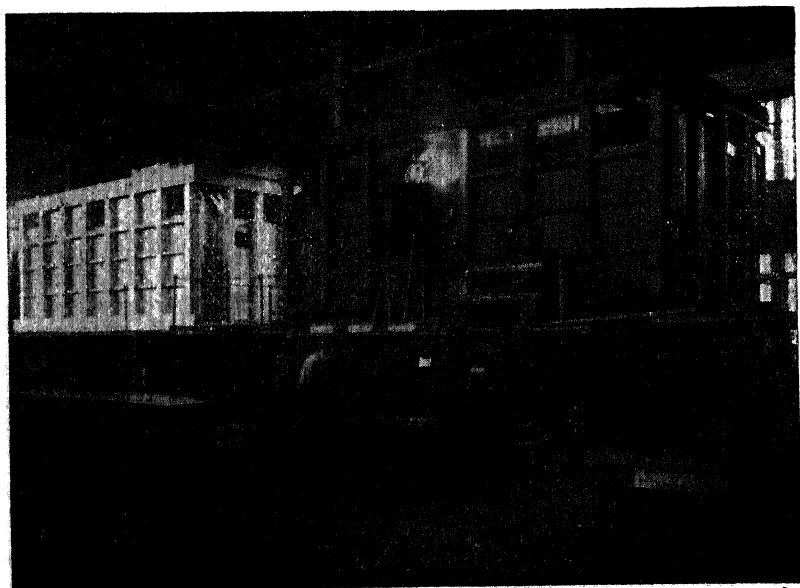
Annealing cover for heat treatment of steel. Entirely arc welded from steel plates and shapes. Weight 35,000 lbs.
